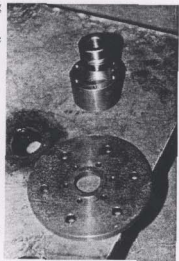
Angular Contact Spherical Bearing and Flanged Housing
